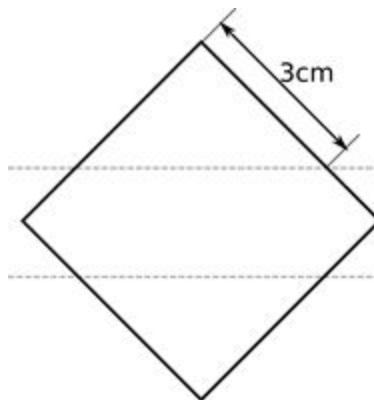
transverse section of the 10 cm piece of aluminium tube
